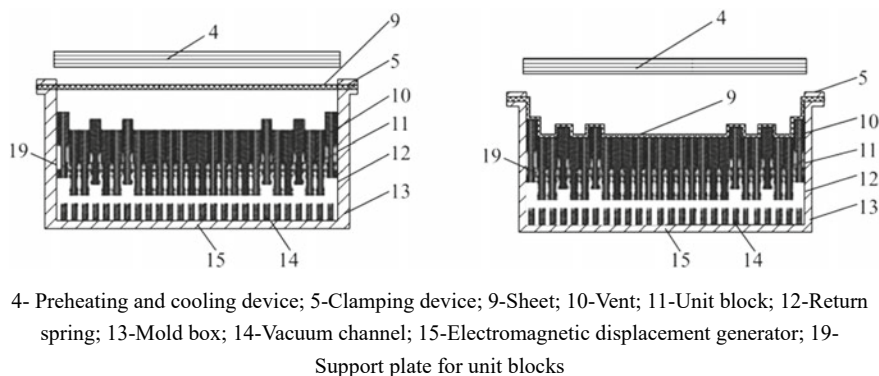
Adaptive blister mold (left: before forming; right: after forming)
